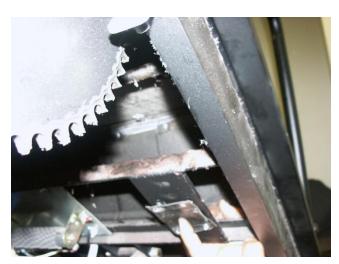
Place Rubber Mounting Pad into Position, Drop Bolts Through Mounting Holes
